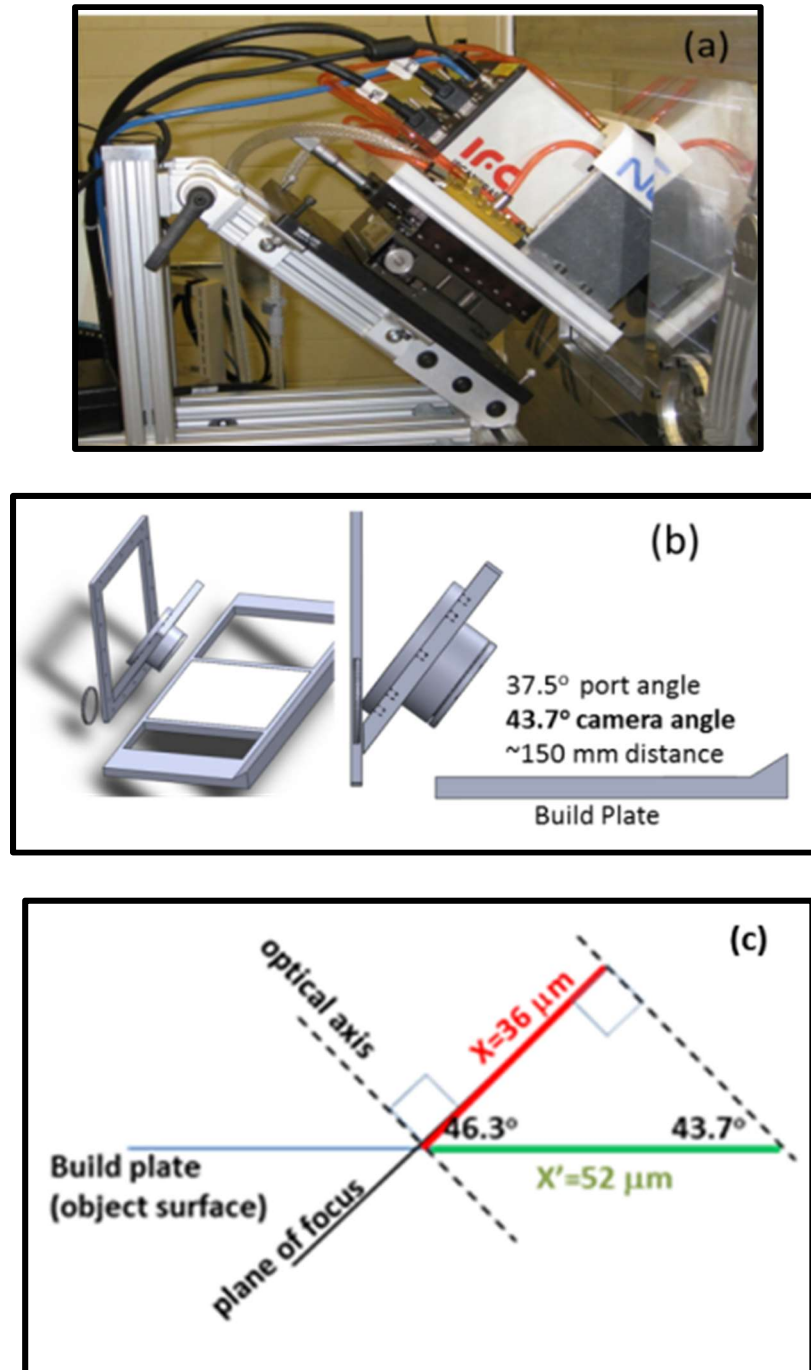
High speed camera set-up: (a) Side-view of the L-PBF machine, custom door, and high-speed camera, (b) CAD solid model of L-PBF machine build chamber and custom viewport, (c) optical axis, plane of focus and vertical iFoV projected on the build plane. (Criaes et al. 2017).
